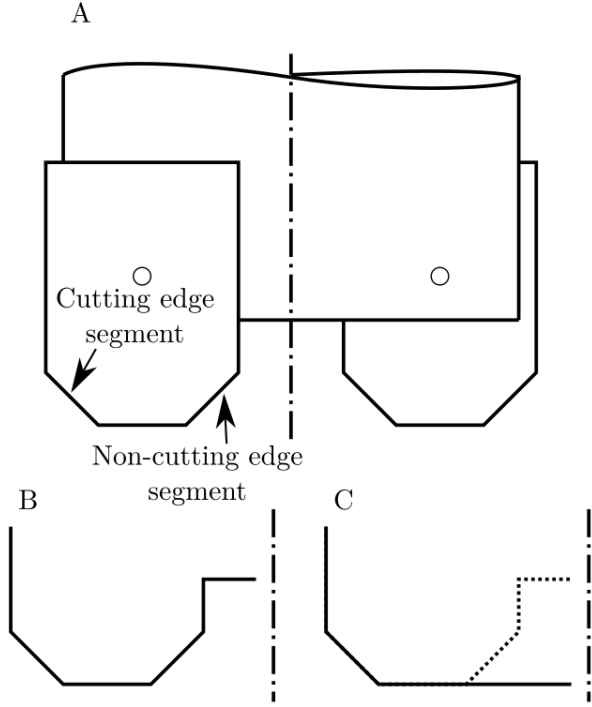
A: Indexable insert tool with arbitrary geometry. B: Tool profile to be rotated. C: Material profile obtained after the pass of the tool.
